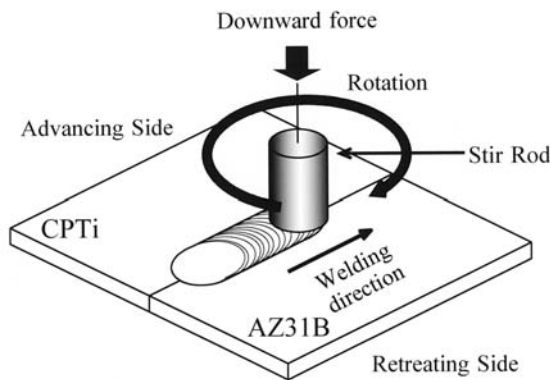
Schematic illustrating the friction stir welding of dissimilar CPTi to AZ31B magnesium alloy.
